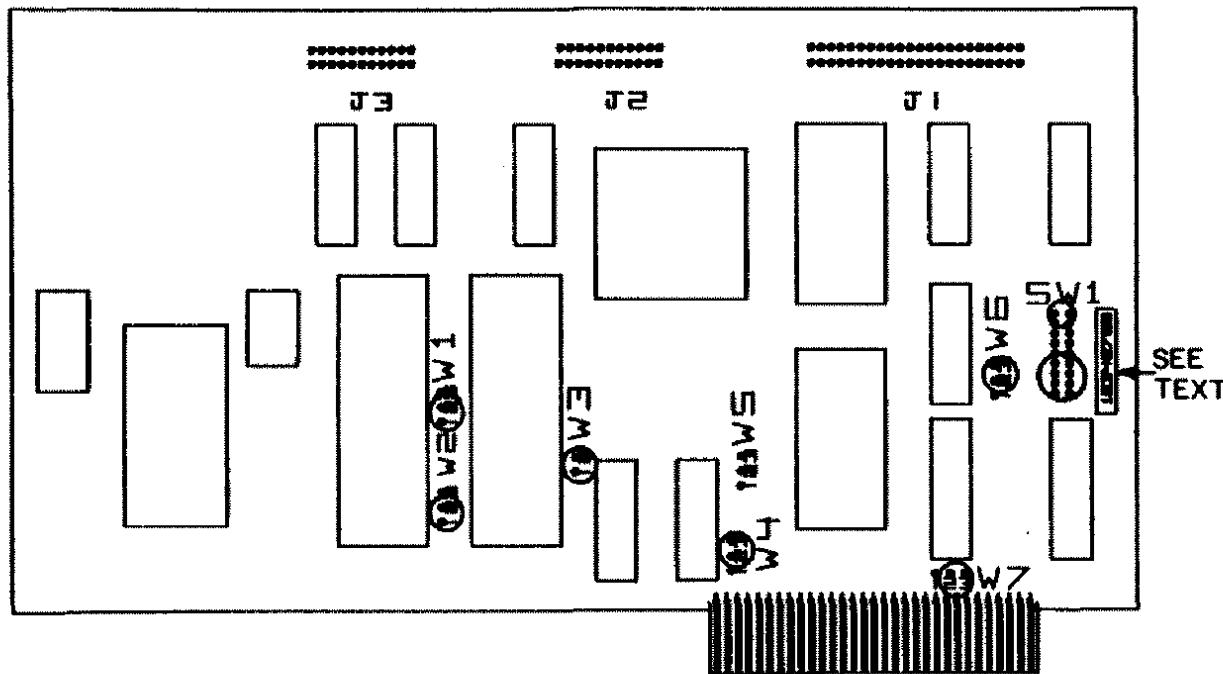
Tandy 1000 WD1010 Hard Drive Controller Board.
